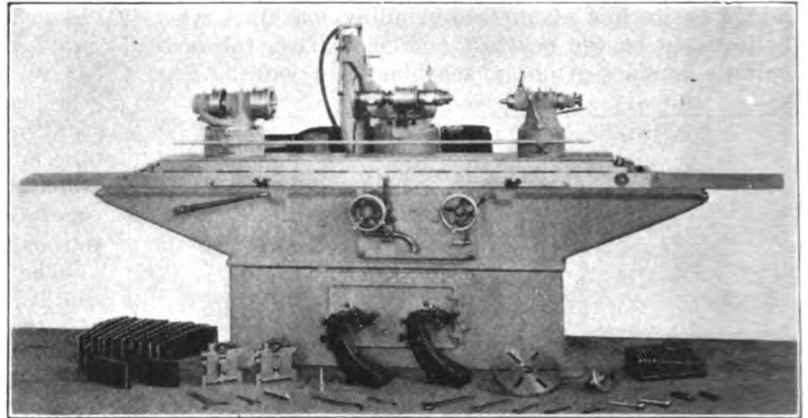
BROWN & SHARPE NO. 4 AUTOMOTIVE GRINDING MACHINE
